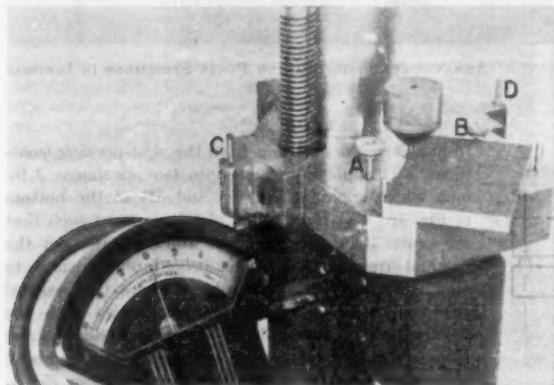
CLOSEUP OF FIXTURE ON ELECTRO-ARC GAGE SHOWING LOCATING PINS AND SPECIMEN IN POSITION
